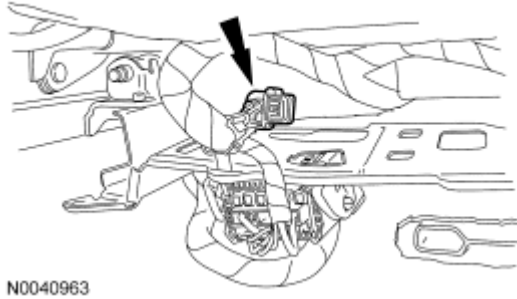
Locating Driver Seat Side Air Bag Module Electrical Connector
